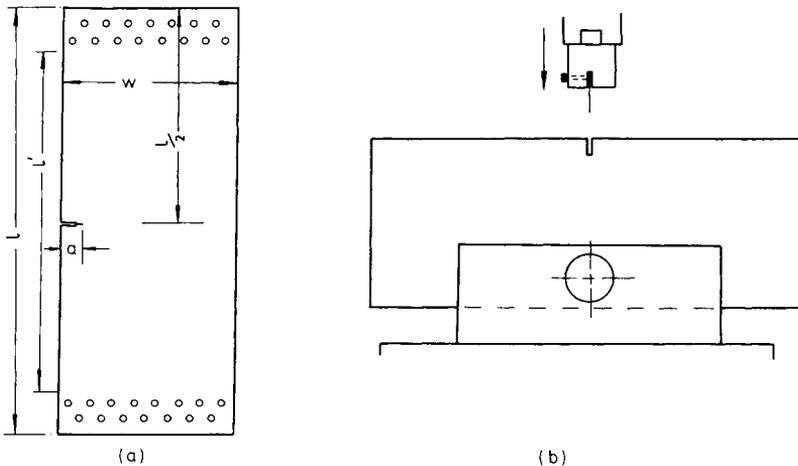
(a) SEN specimen geometry. (b) Method of notching.
